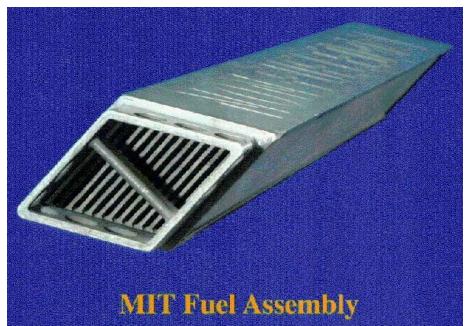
RENDERING OF MIT FUEL ASSEMBLY
